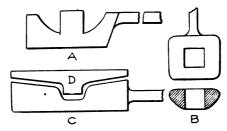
TOOLS AND PROCESS OF FORGING YOKE ENDS.
